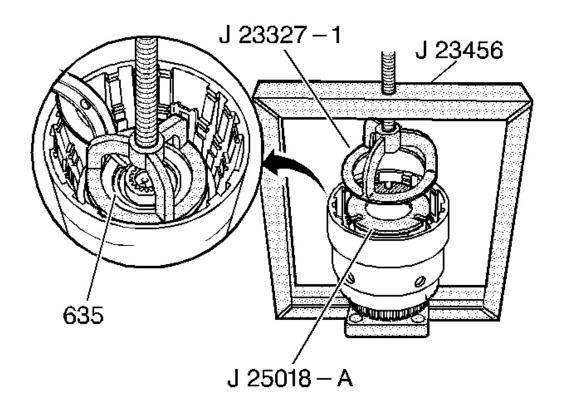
View Of Overrun Clutch Spring Retainer Snap Ring & Special Tools Courtesy of GENERAL MOTORS CORP.
